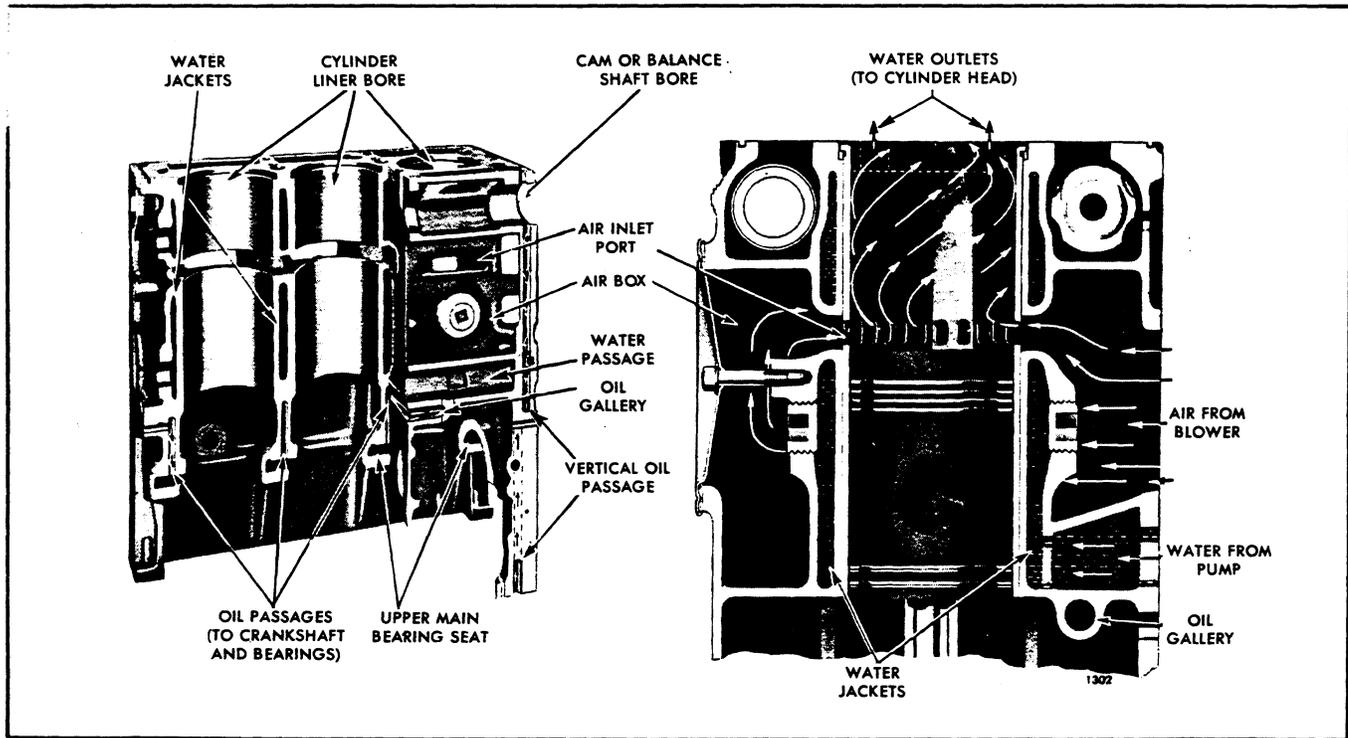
Cutaway View of Cylinder Block Showing Air and Water Passages
